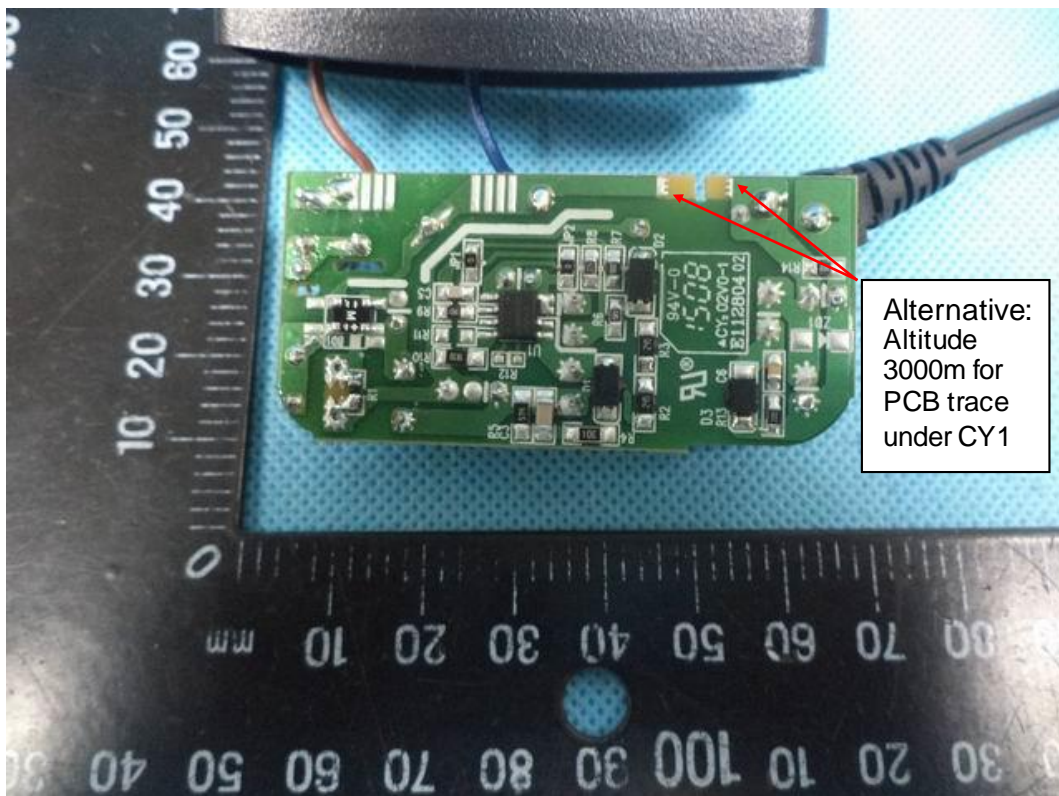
GT-86060-WWVV-W2E (PCB layout REV:103 for Altitude 3000m)
